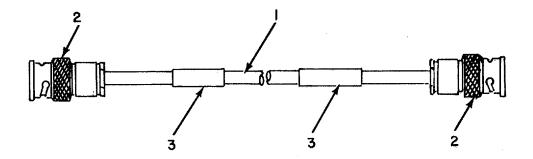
Cable Assembly, Power Electrical CX-12005/USM-159.
